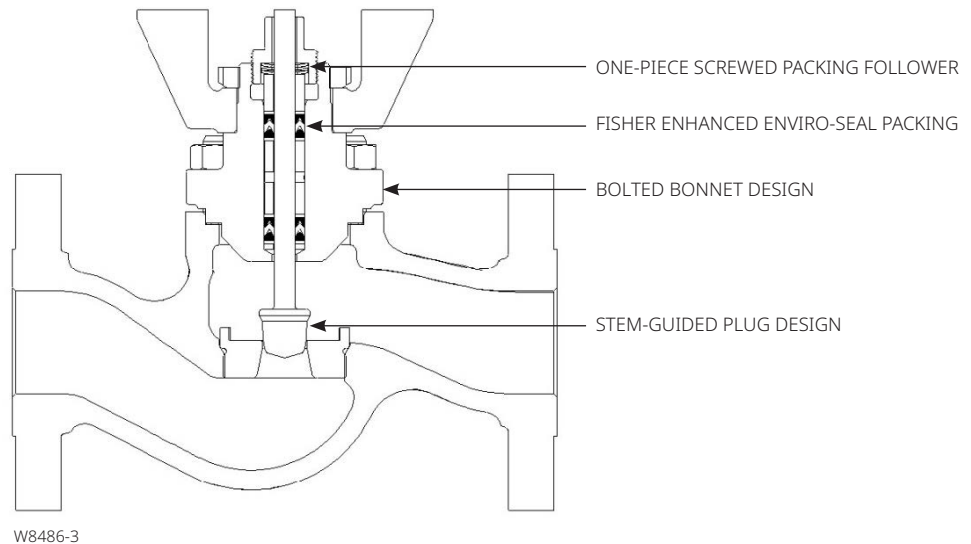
Fisher GX Bolted Bonnet Control Valve Assembly with Stem-Guided Contoured Plug (Size DN 25 and NPS 1)
